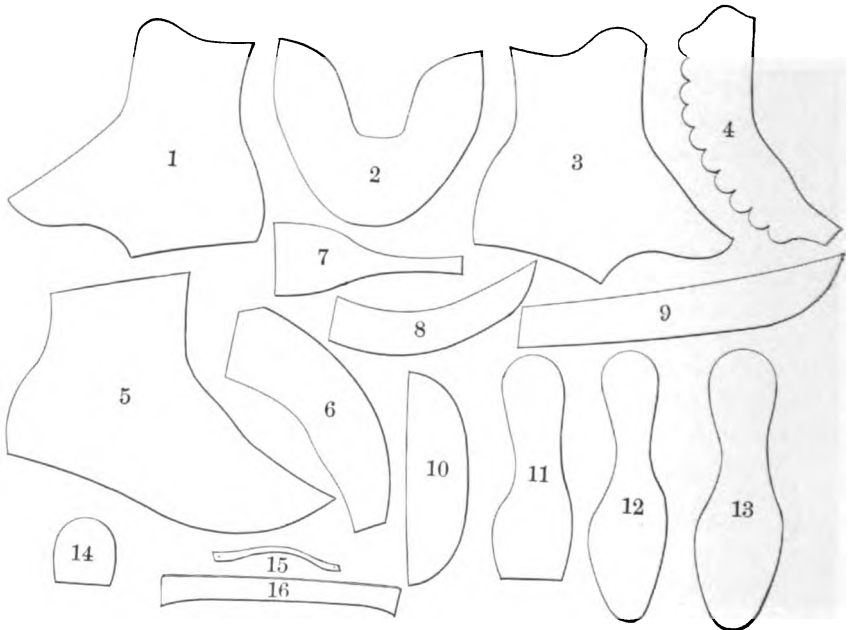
PARTS OF A BUTTON SHOE. 1, Large quarter; 2, vamp; 3, small quarter; 4, button piece; 5, drill lining; 6, glove button-piece lining; 7, heel lining stay; 8, button stay; 9, top stay; 10, heel stiffener; 11, sole lining; 12, inner sole; 13, outer sole; 14, heel lifts (six); 15, steel shank; 16, rand.
